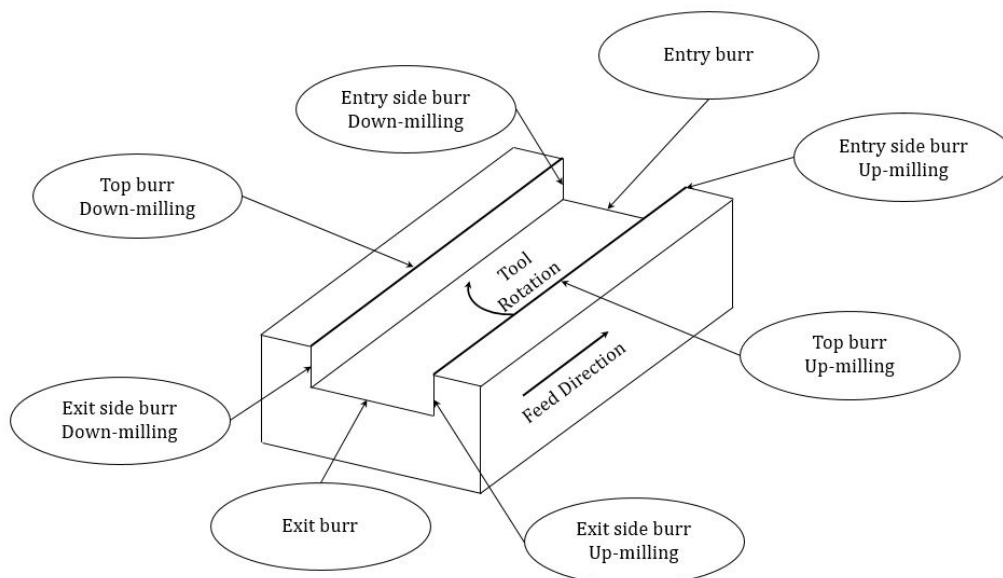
Eight types of burr formed in milling operation(Ref 60)
